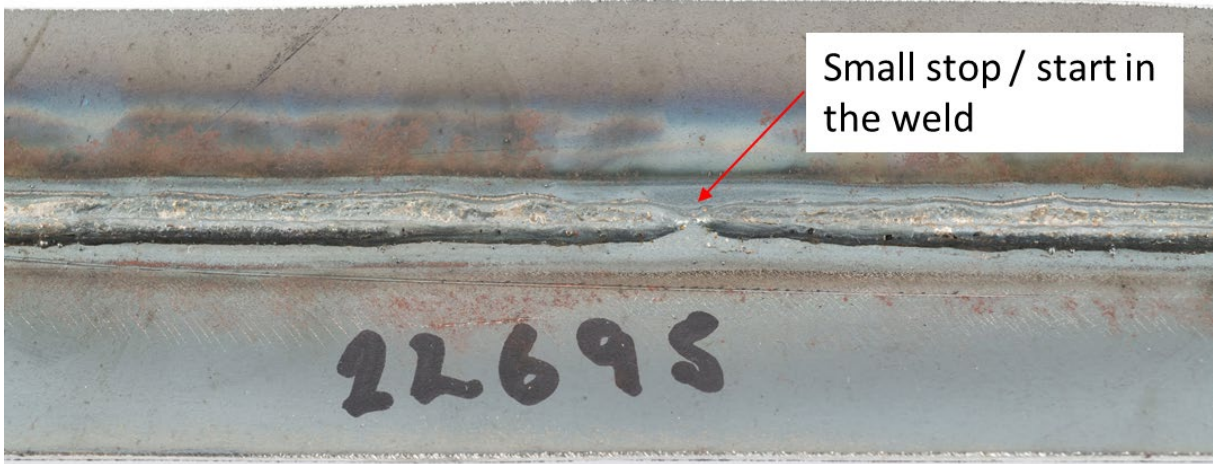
Photograph showing an example of a stop / start a weld
